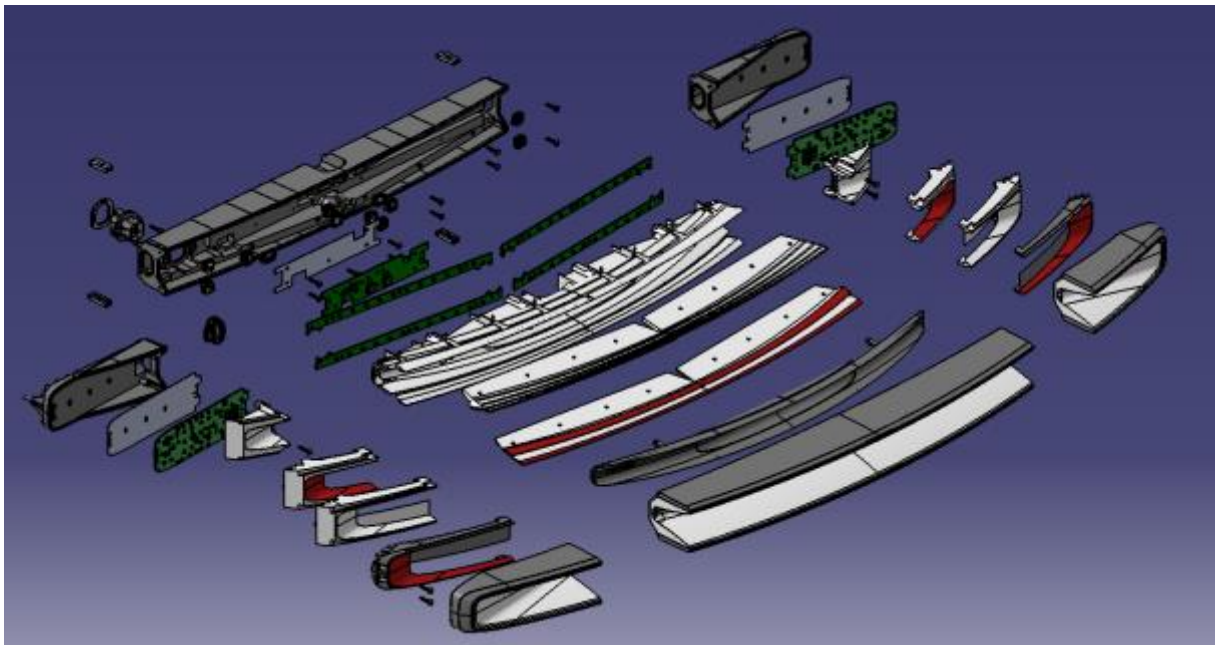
Exploded view of TYRI's new product with the three parts clearly separated.
